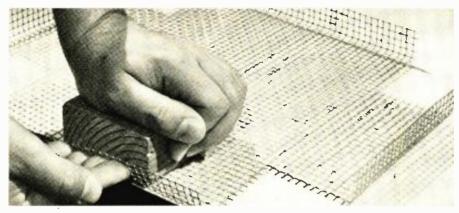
How the chassis flange can be formed by hand by bending the material against a wooden block. If unusually heavy components are to be mounted on a "basket chassis" stiffeners, in the form of additional pieces of the hardware cloth, may be fixed to the chassis by working the wire stubs into the chassis surface. These structures could also be used to form shielded compartments within the chassis proper.
